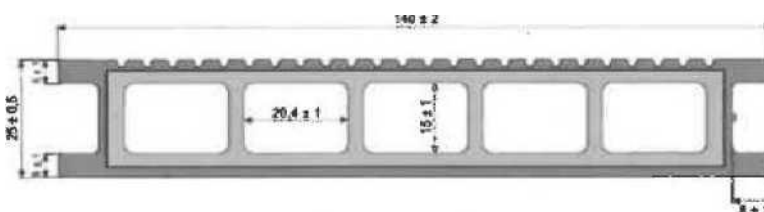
GAMRAT WPC Decking Board 140×25 mm, single-sided grooved
